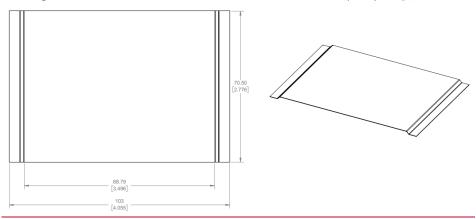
Small Card Bottom Side Insulator (Side View) TBD < need 2D drawings>
